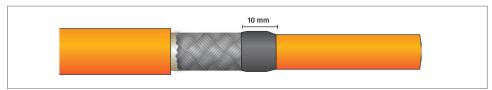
Step 5: Attaching and fixing the heat-shrink tubing
